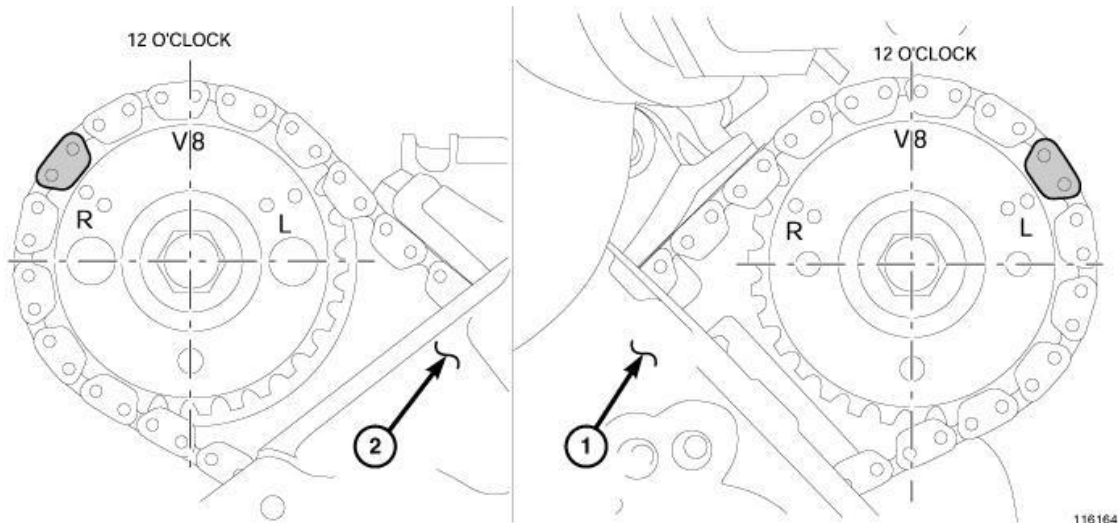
V8 Timing Mark On Camshaft Sprocket
